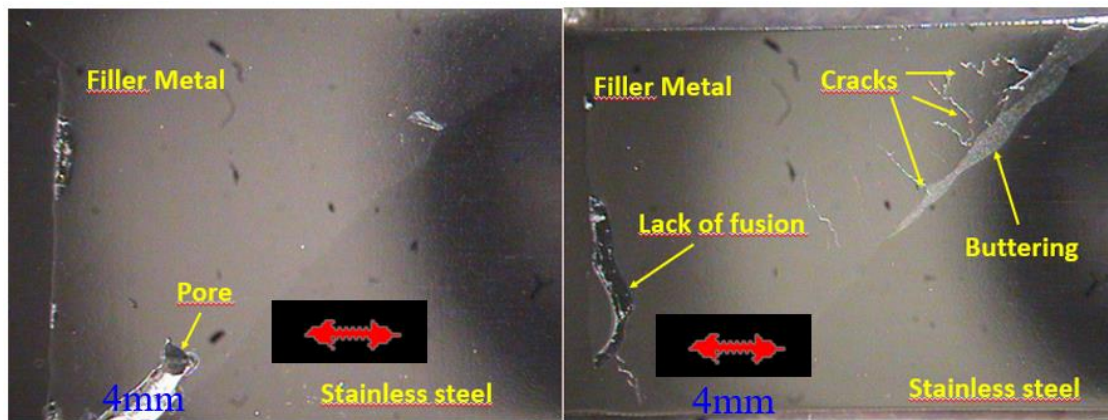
Samples at 7x magnification showing cracks and lack of fusion of the dissimilar welded joints.
